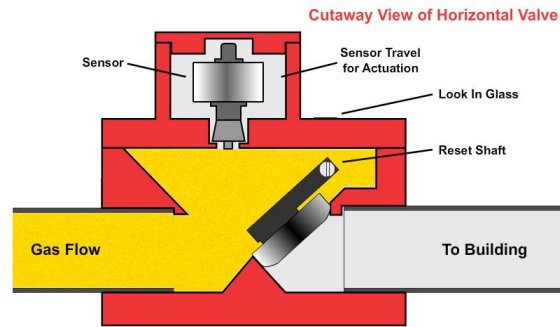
Cutaway view of horizontal valve after an earthquake [15].
